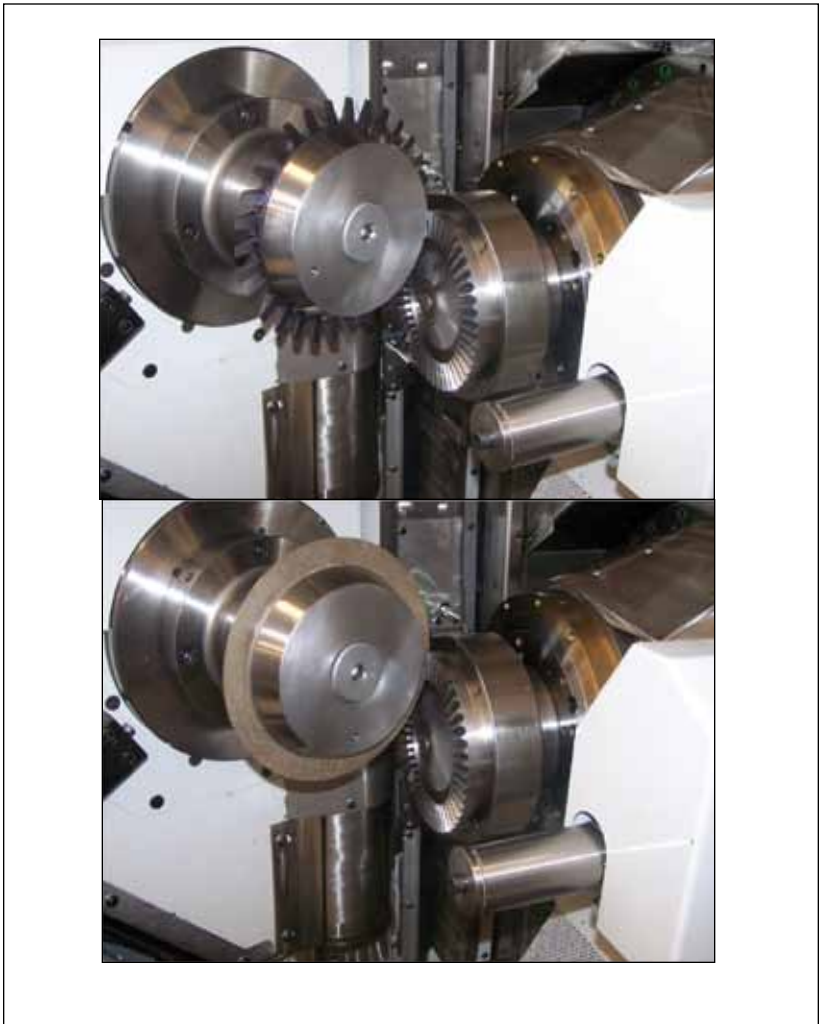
Face gear cutting (top) and grinding (bottom) in free form machine.
